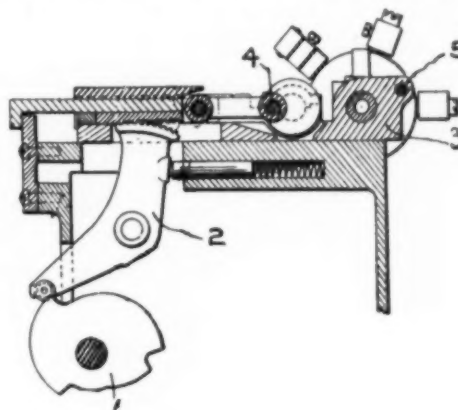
FEEDING OF TURRET SLIDE BY CAM SPECIALLY FORMED FOR THE JOB—ADDITIONAL QUICK RETURN DEVICE.
